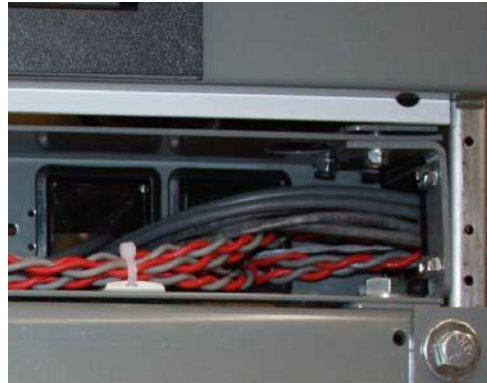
ULP and 24V cables brought through side openings of bottom front wireway
